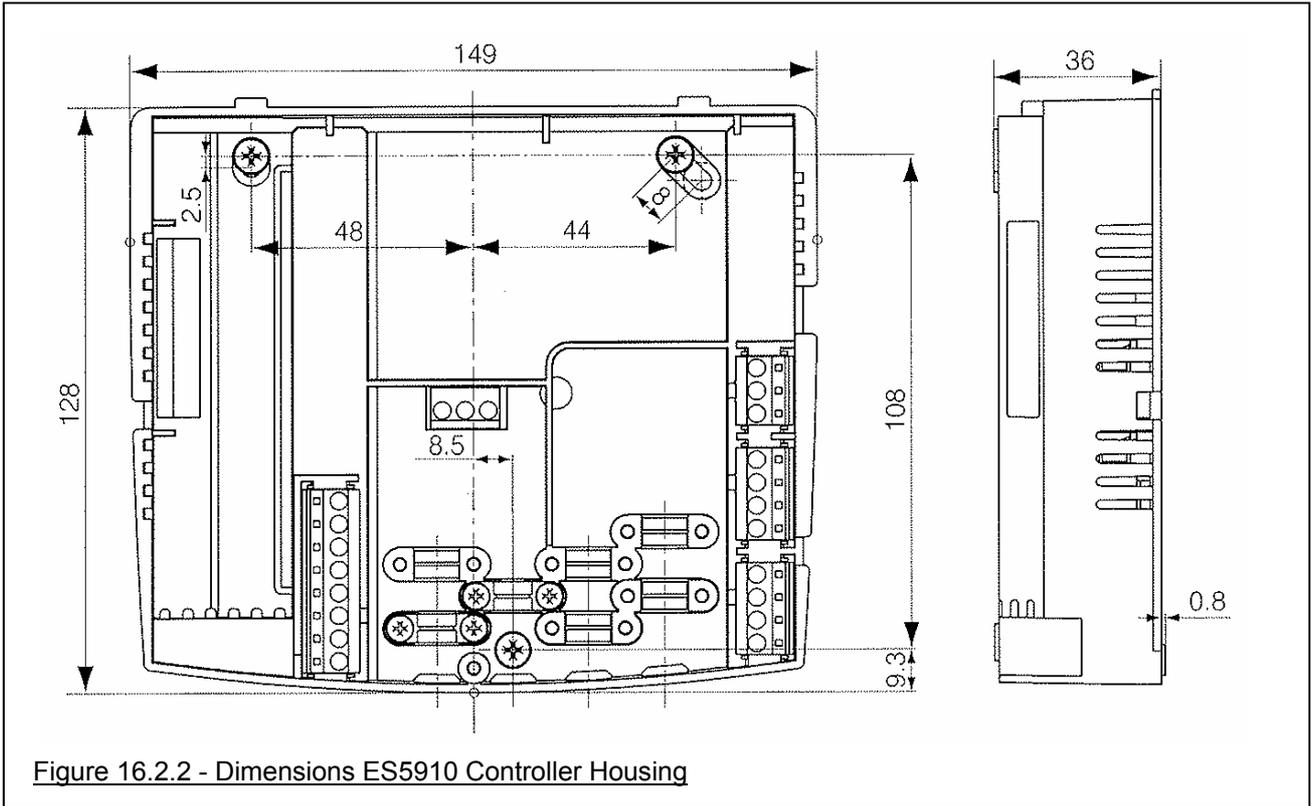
Dimensions ES5910 Controller Housing
